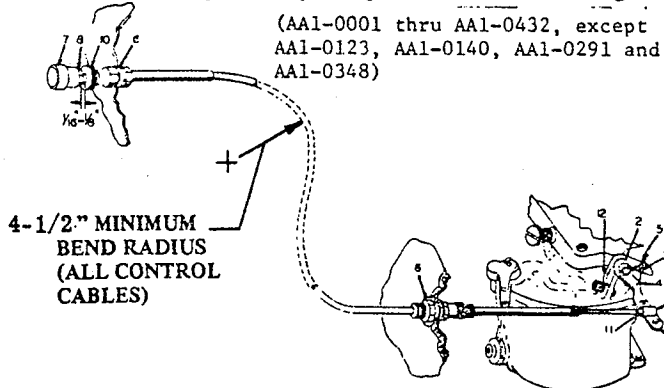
CARBURETOR THROTTLE ARM AND CABLE RIGGING
